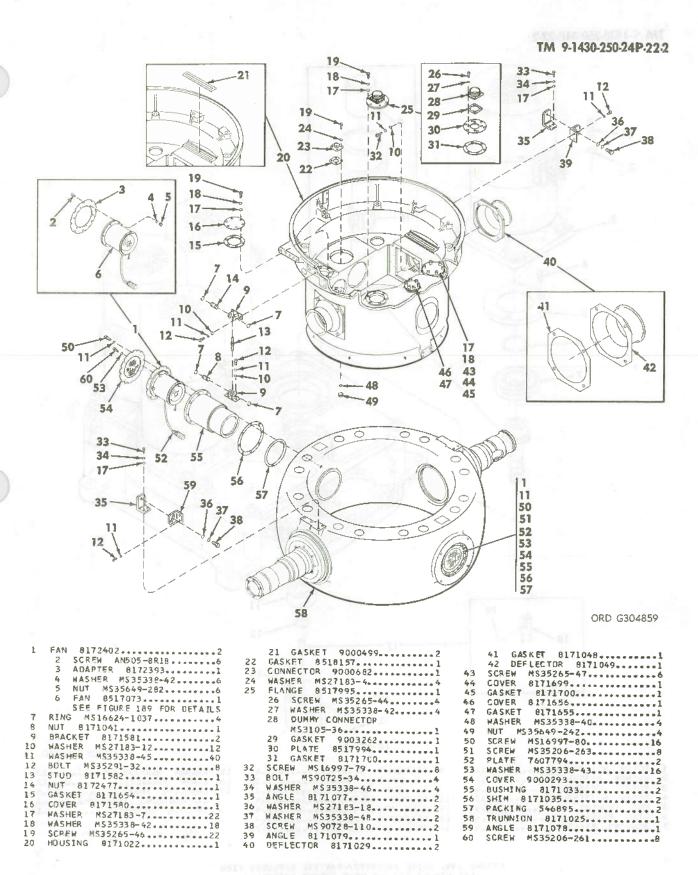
HOUSING /8171020/-PARTIAL EXPLODED VIEW
